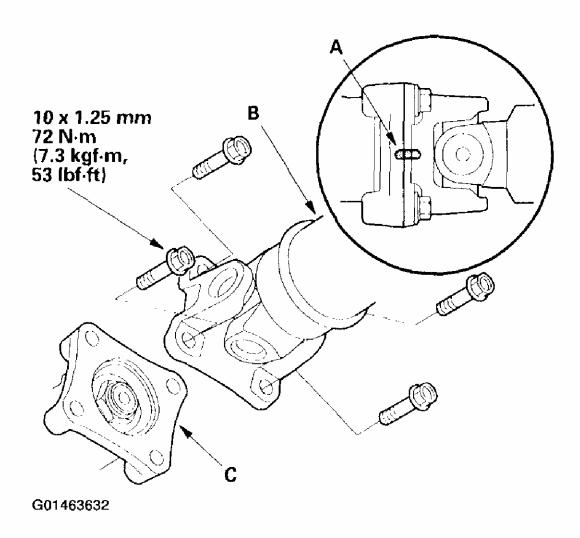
Aligning The Reference Marks On The Propeller Shaft & Transfer Shaft Flange, & Installing The Propeller Shaft Courtesy of AMERICAN HONDA MOTOR CO., INC.
